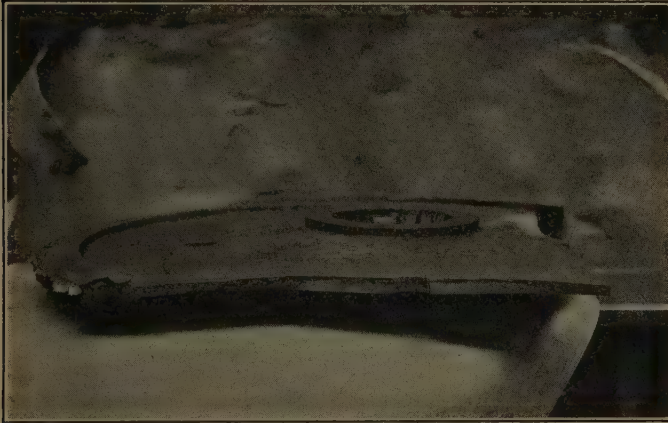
DETAIL SHOWING HOW THE CRACK STARTED AT ANOTHER HOLE
